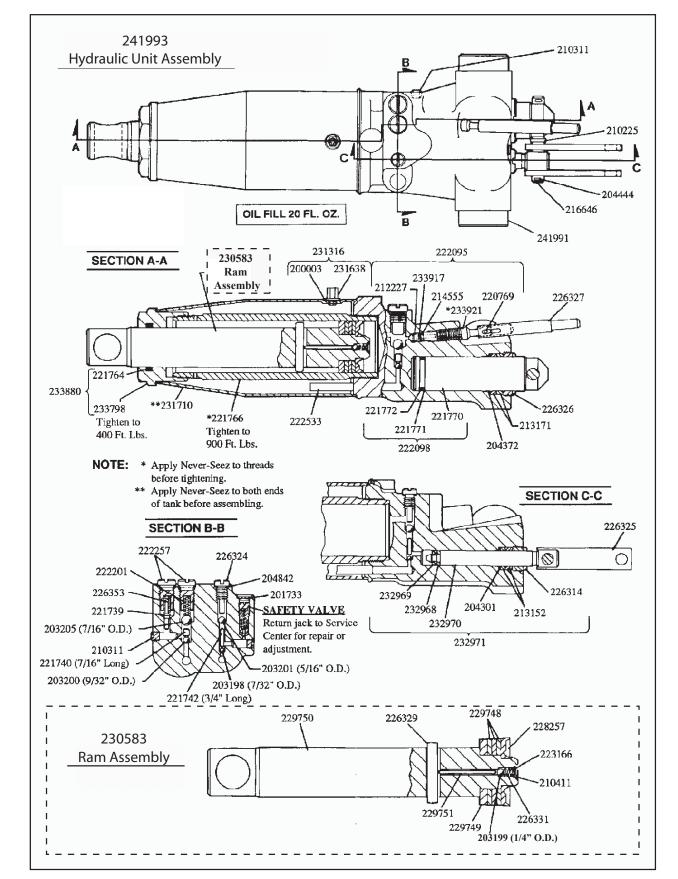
Parts Illustration for Model HW93657 (Hydraulic Unit)
